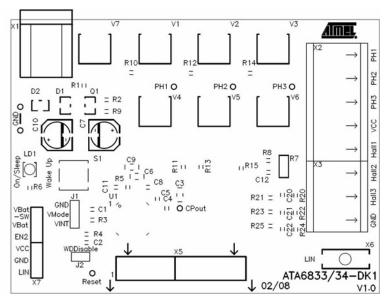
Application Basis Board Top View Component Placement ATA6833/ATA6834-DK1
